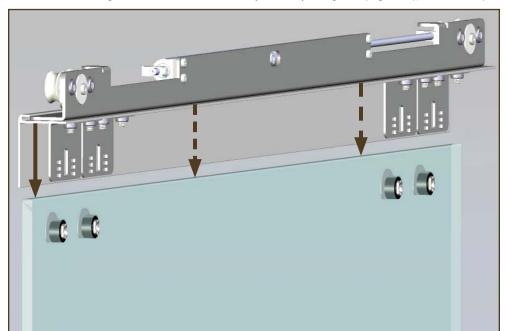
Support Spacer and Retainer Weldment inserted into holes of Glass.
